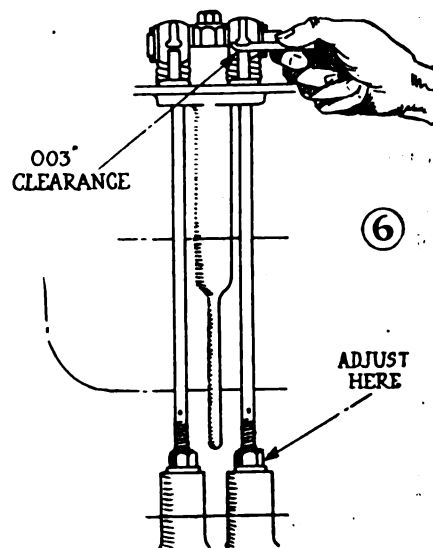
The push rods are adjusted so that there is a clearance of .003 in.
